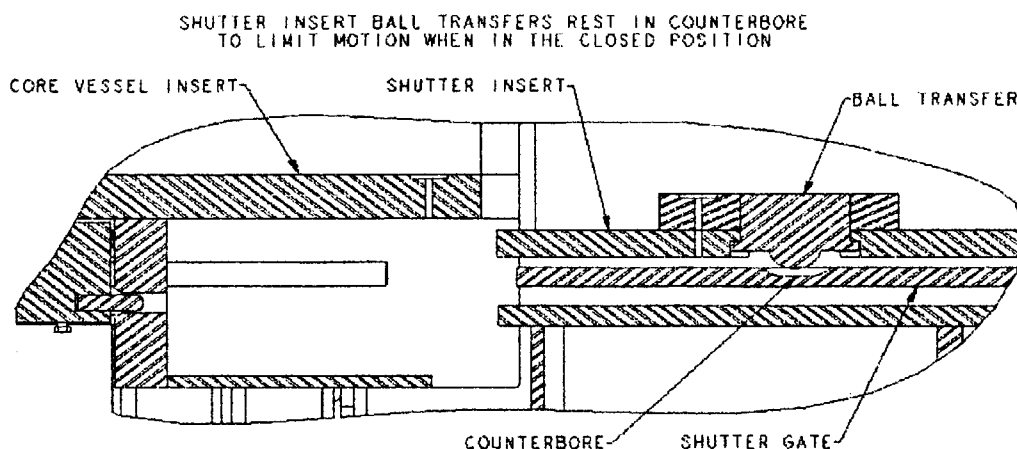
DVTS Shutter Insert Ball Transfer Supports
